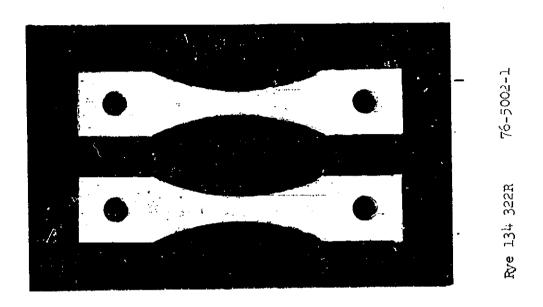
Photograph showing the extent of corrosion on Lockalloy (Be-38%Al, 0.25" thick, sheet HC 160-1) specimens (6SC-3T and 6SC-5T) after 40 hours of exposure to salt spray.
